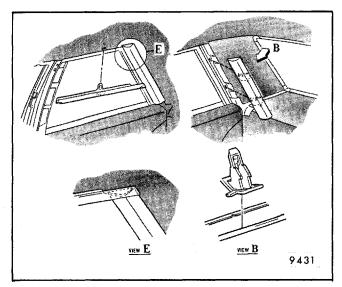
Rear Quarter Window Garnish Molding - B,C Styles Typical
